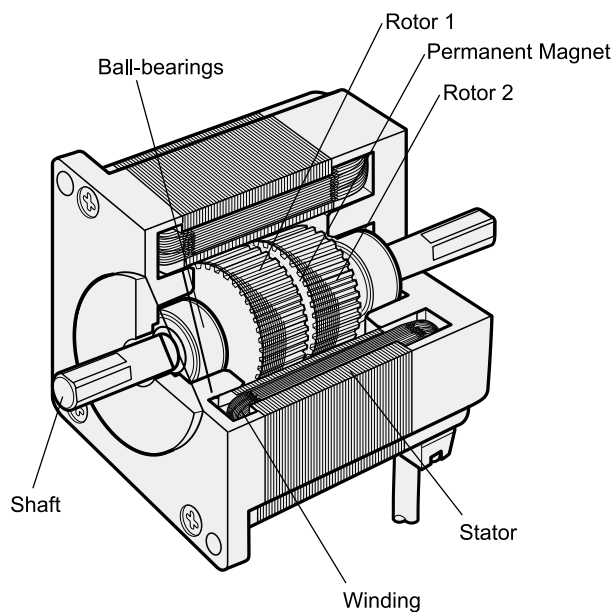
5 Phase Stepping Motor Cross-Section Parallel to Shaft
